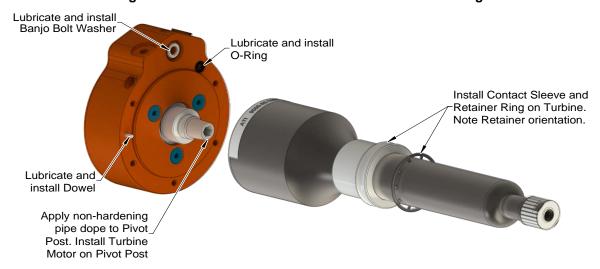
Turbine Motor Removal from Rear Housing Assembly
